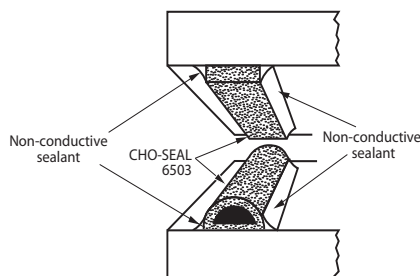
"Seal-to-seal" design incorporating CHO-SEAL® 6503 conductive silver-aluminum fluorosilicone gaskets on both mating flange surfaces. Gaskets are bonded and edge sealed to prevent moisture from entering the gasket/flange area.
